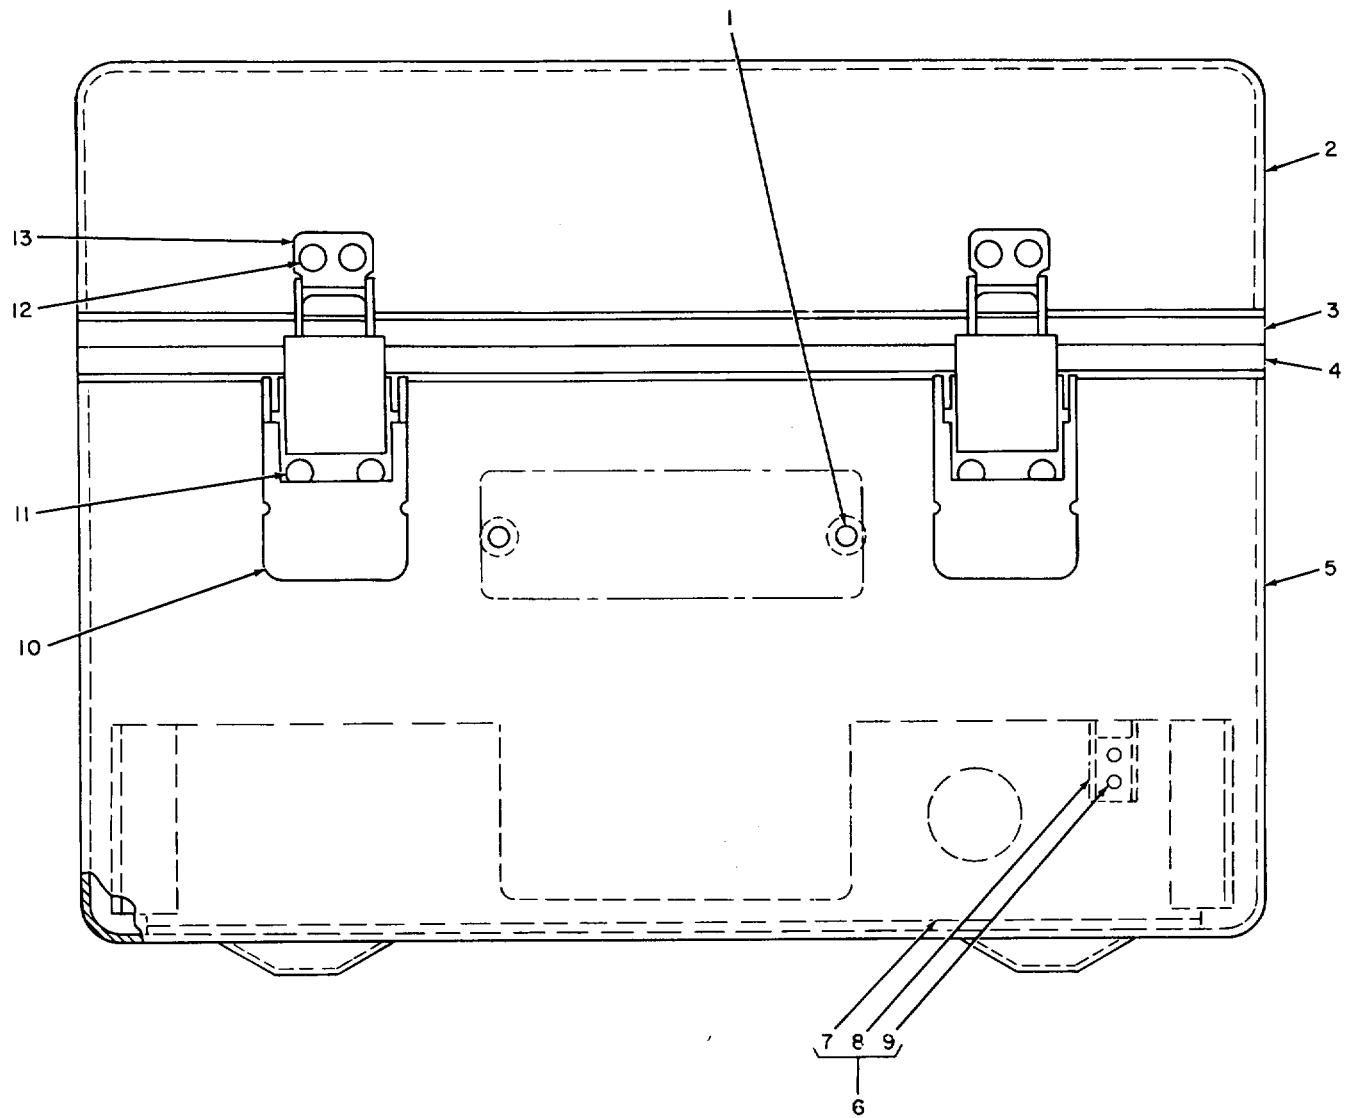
Socket Assembly, Charging (Sheet 2 of 2).
